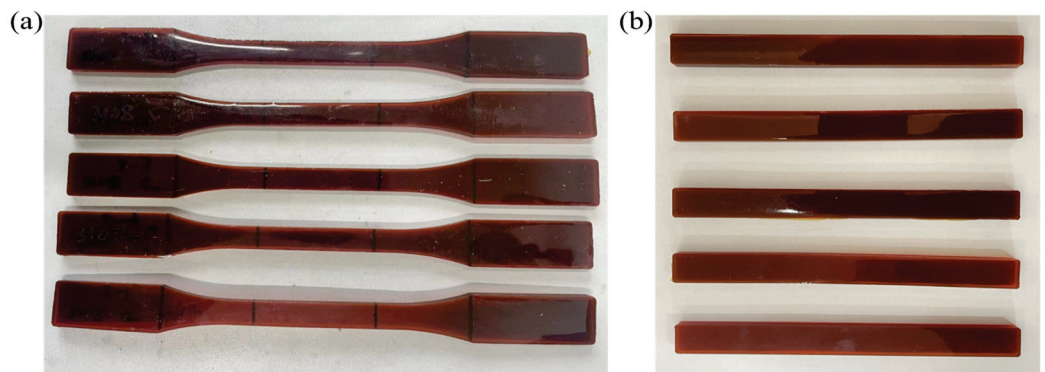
The prepared specimen: (a) tensile test specimen, (b) bending test specimen.
